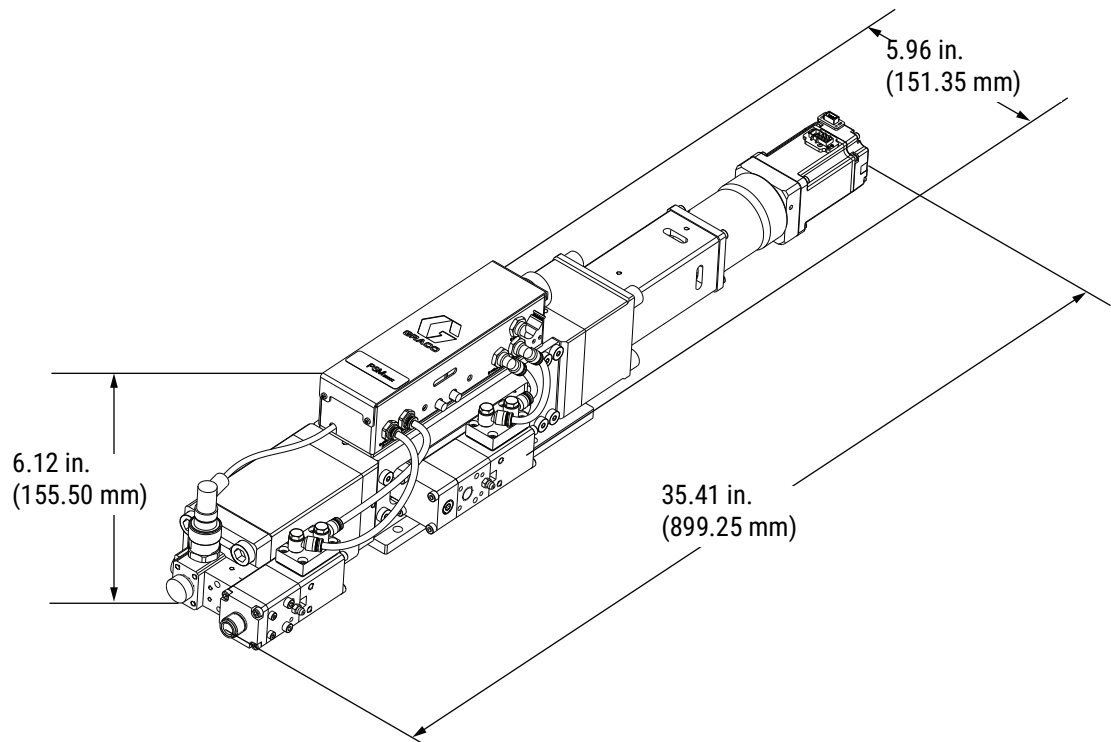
PSM Ambient Metering Unit Dimensions, 200 cc
